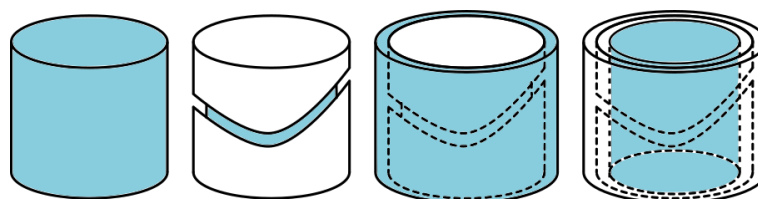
Schematic representation of a manufacturing method that could be used for the in-side-out cam. The manufacturing process will start with a cylinder. A groove with the right dimensions will be made in the same manner as during the fabrication of a regular barrel cam. Subsequently a metal tube will be glued around the barrel cam. Now a hole with the right diameter can be drilled through the centre of the barrel cam. This would result in the wanted in-side-out cam.
